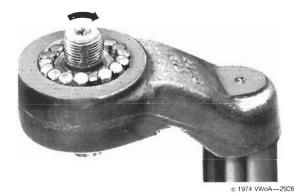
Direction peg should be turned (arrow) when removing peg and tapered rollers.
